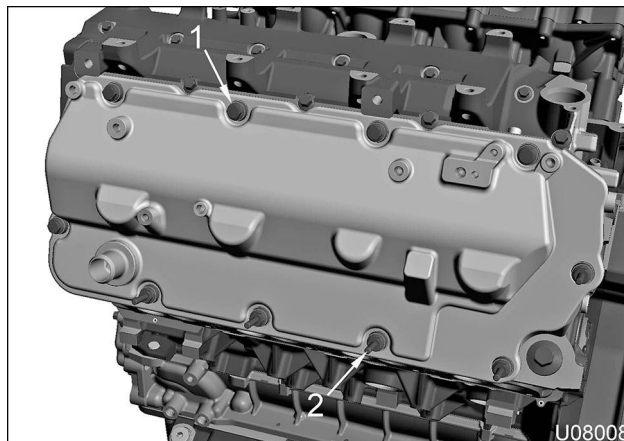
M16 x 172 Cylinder head bolt (10)
